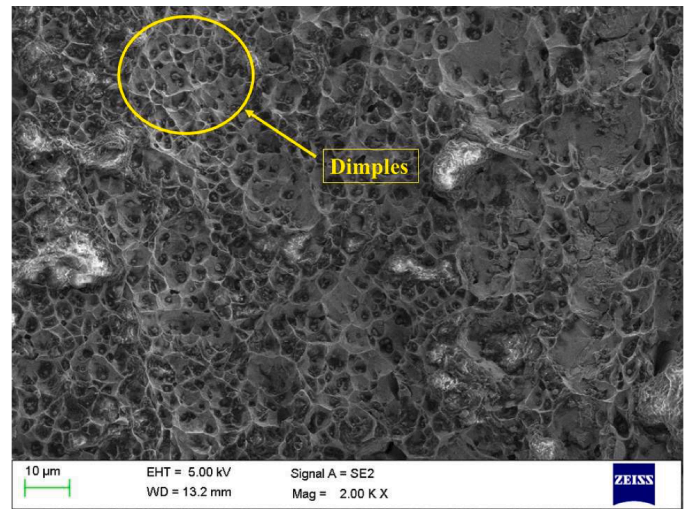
Fracture surface morphology of tensile test specimen.
